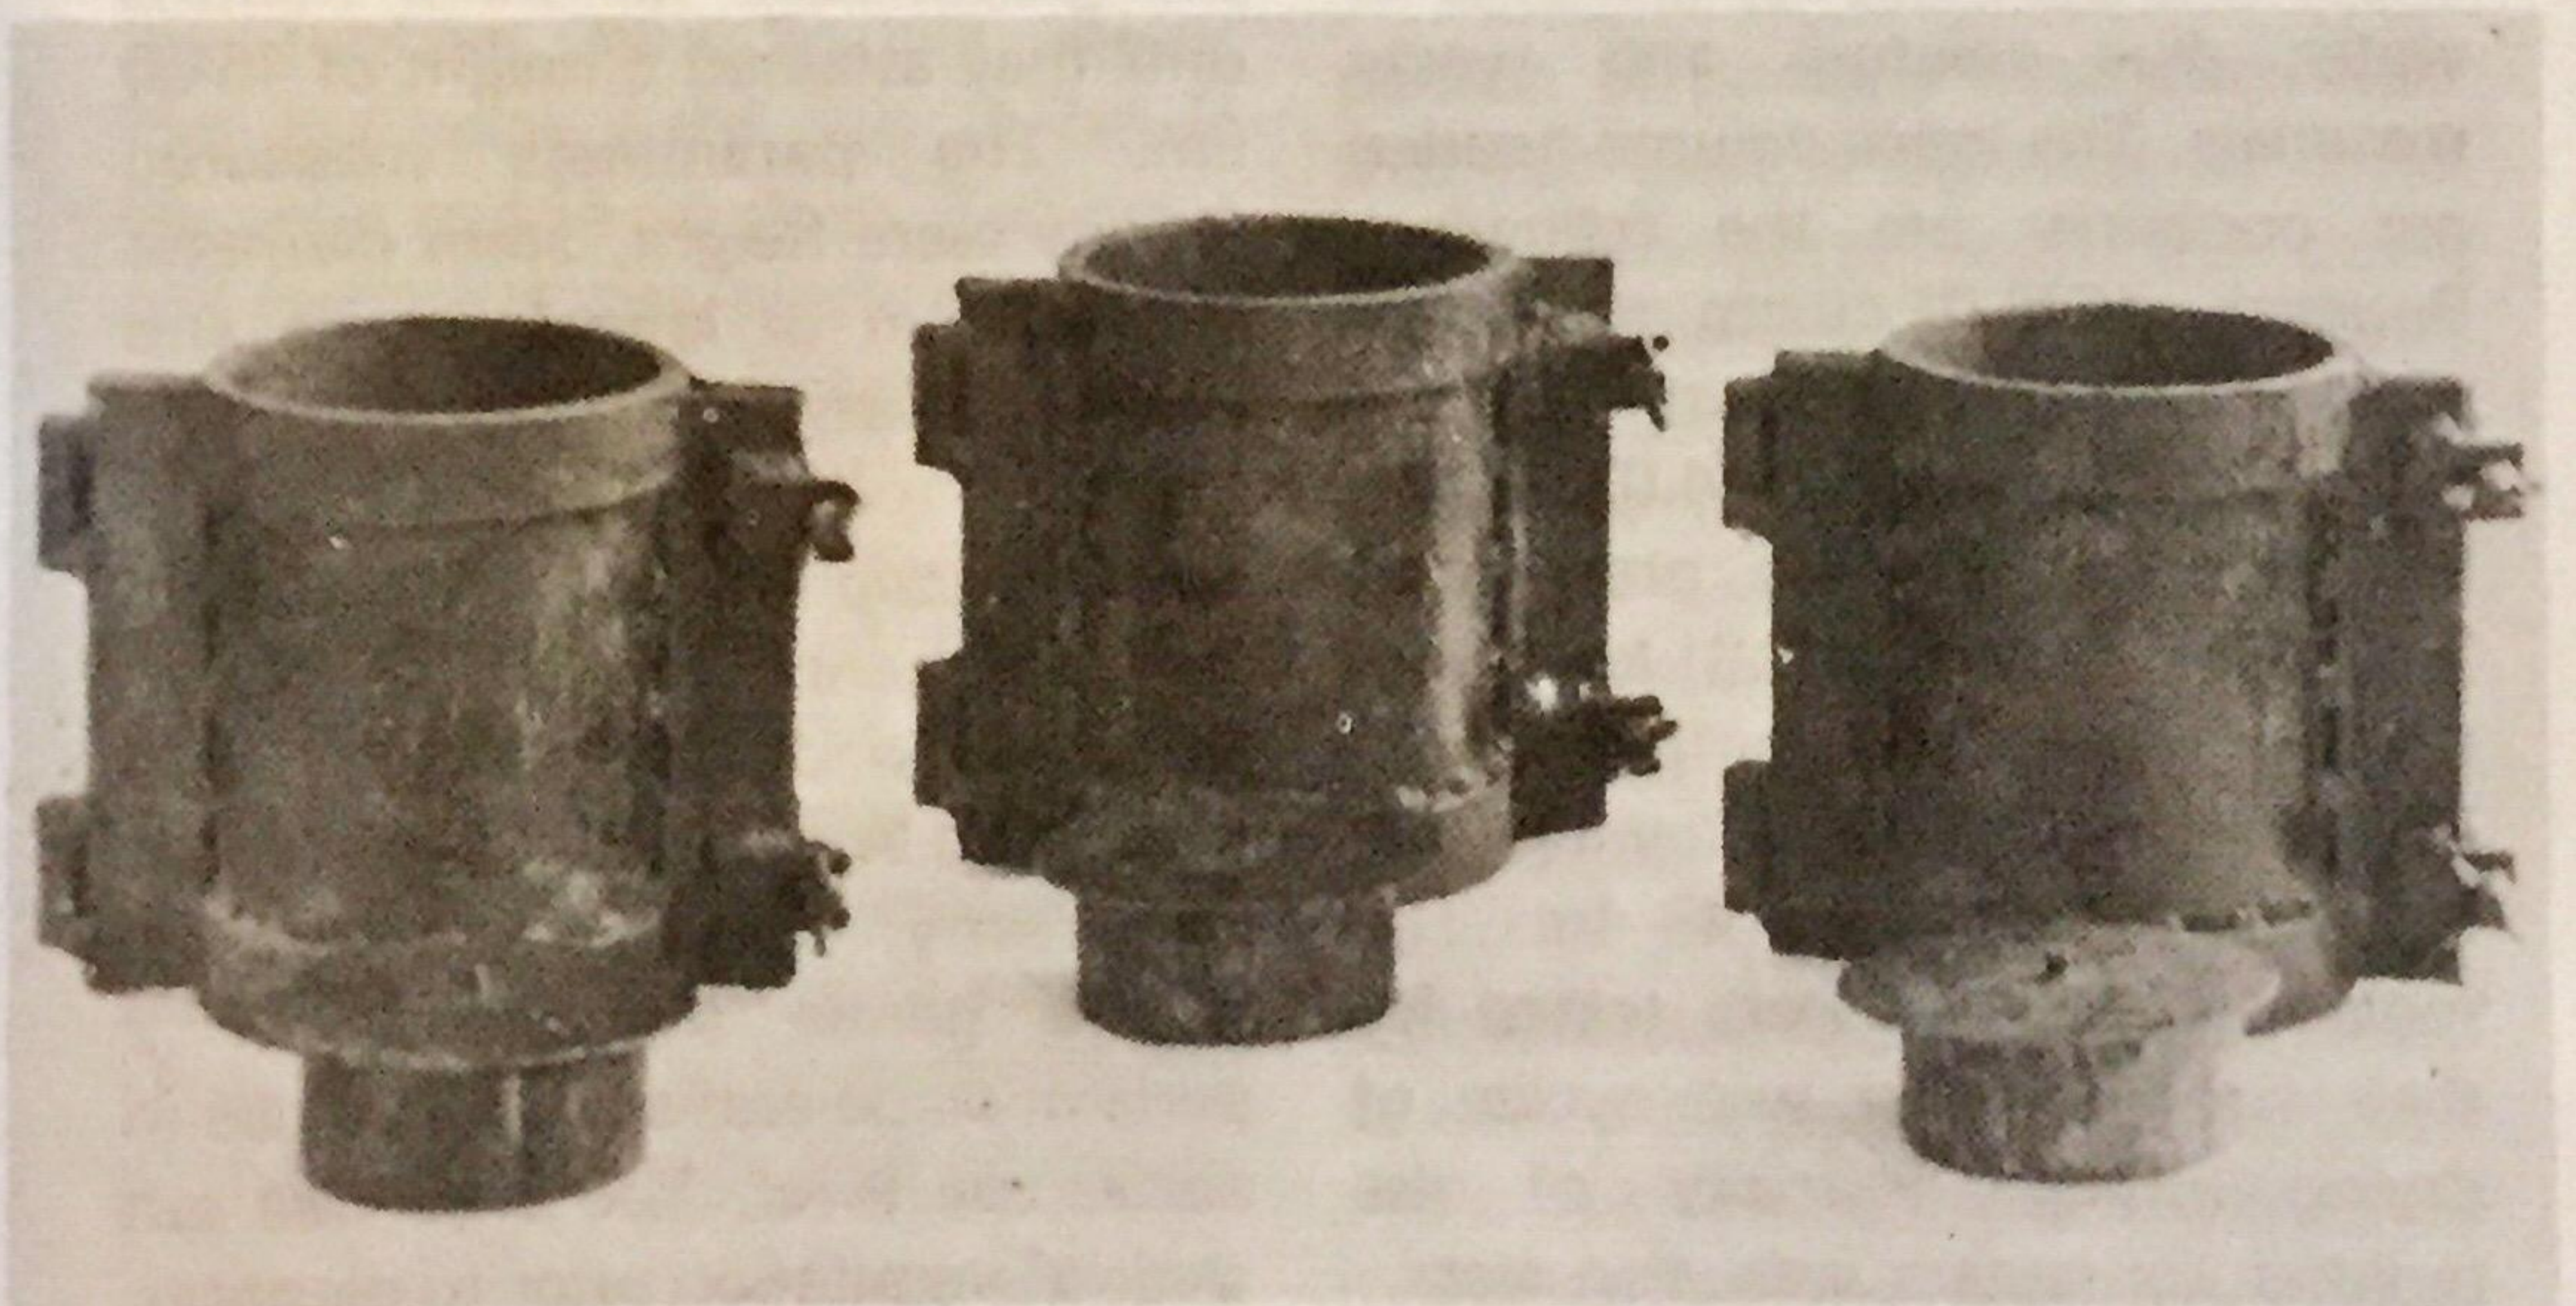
Metal molders used in the manufacture of seedling containers using bagasse, rice straw, sawdust and coir dust (30x).
